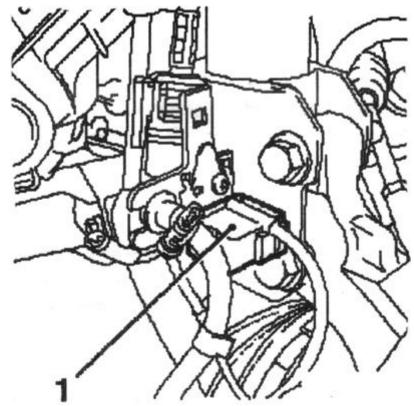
Sensor spring Rack CDC: 1 sensor
